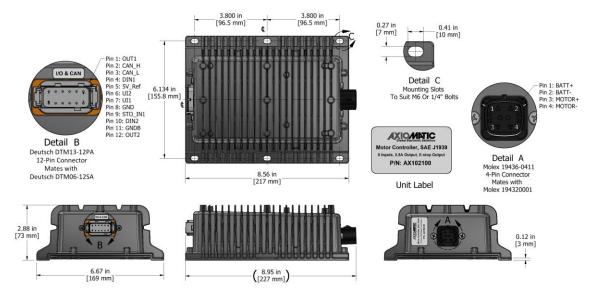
Dimensional Drawing (Dimensions are same as AX102100)
